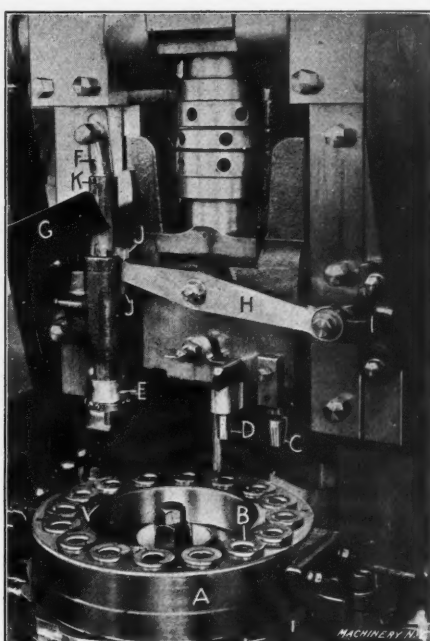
Verifying Machine in which the Reducing of the Shell is completed
